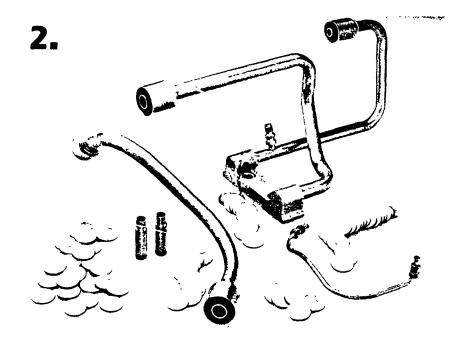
AUTOMOBILE PARTS Courtesy: G & J Steel and Tubing, Inc.
